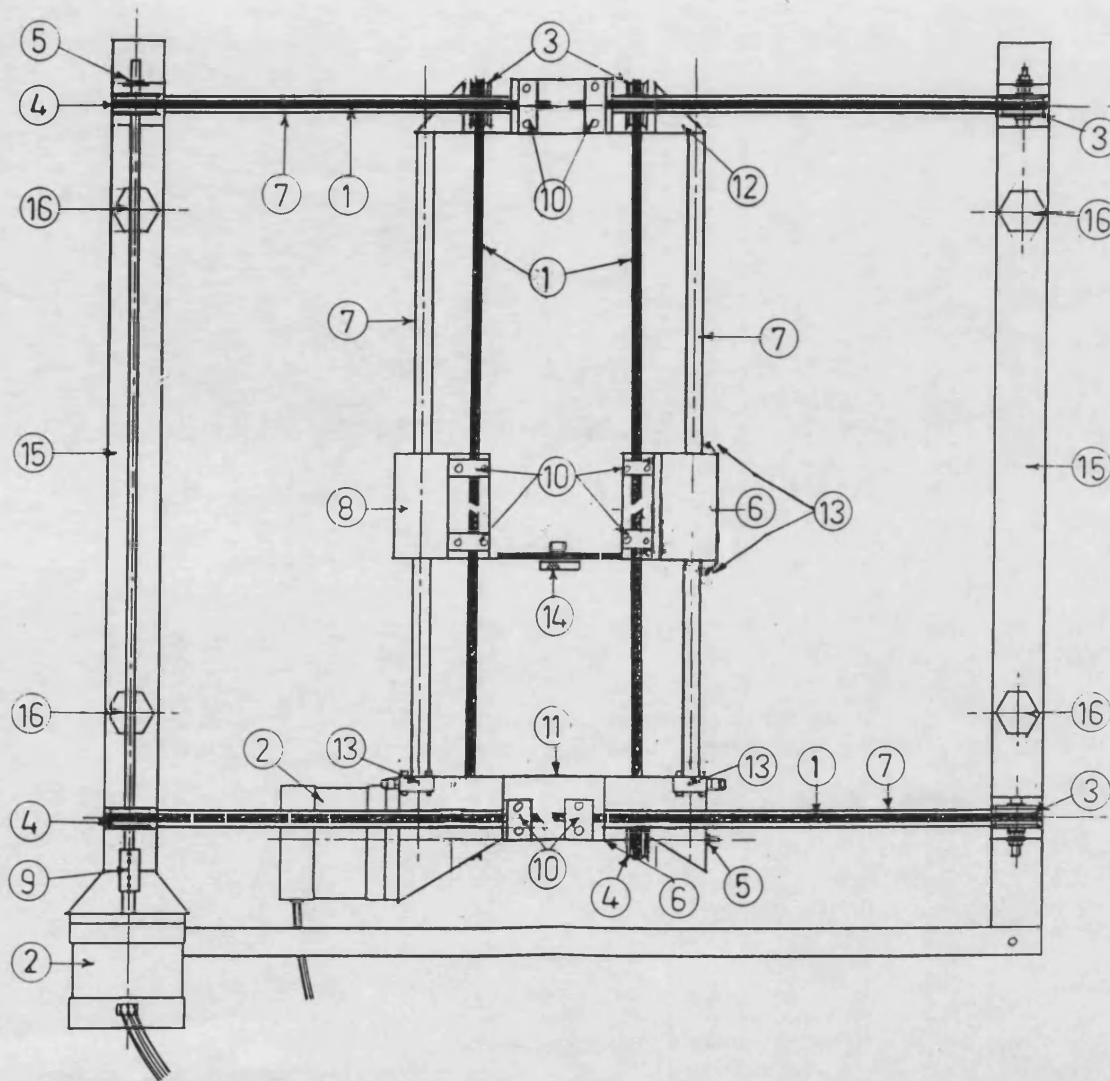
SCANNER TOOTHED BELT DESIGN
